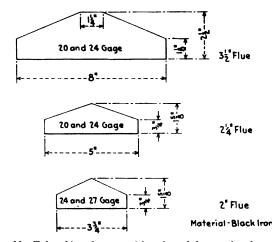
Tube shims for use with enlarged front tube-sheet holes
